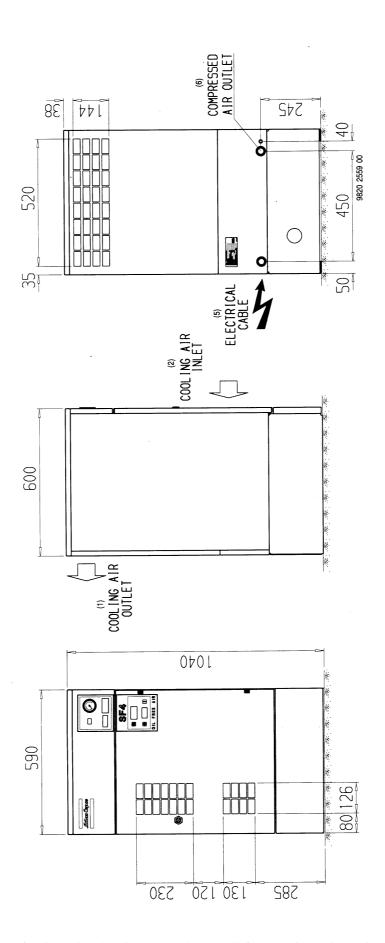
Dimension drawing, SF Pack and Full-feature with optional air receiver
